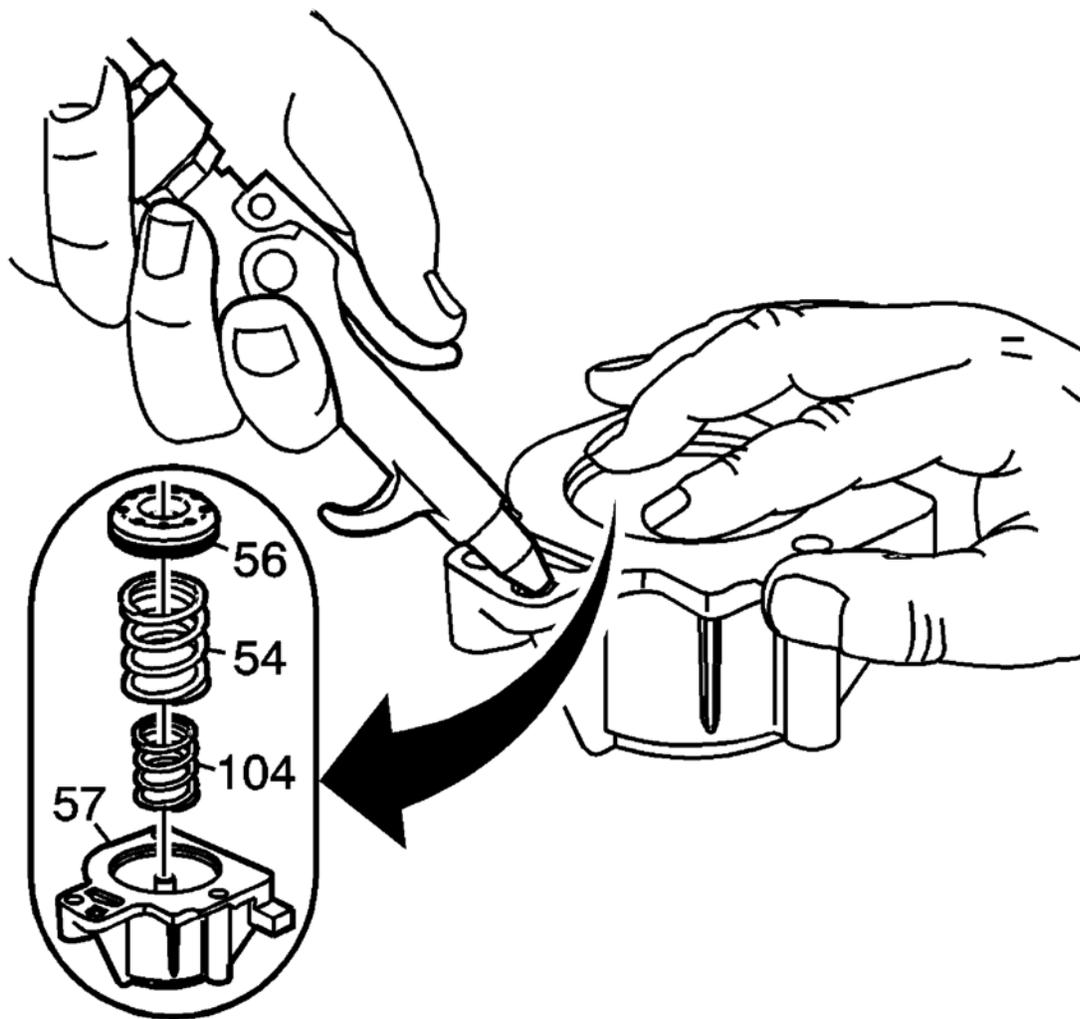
Identifying Accumulator Housing, Accumulator Piston, 1-2 Inner & Outer Accumulator Springs
